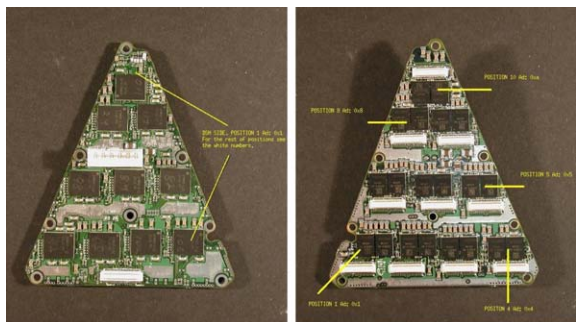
TRT barrel front-end electronics printed-circuit board.
